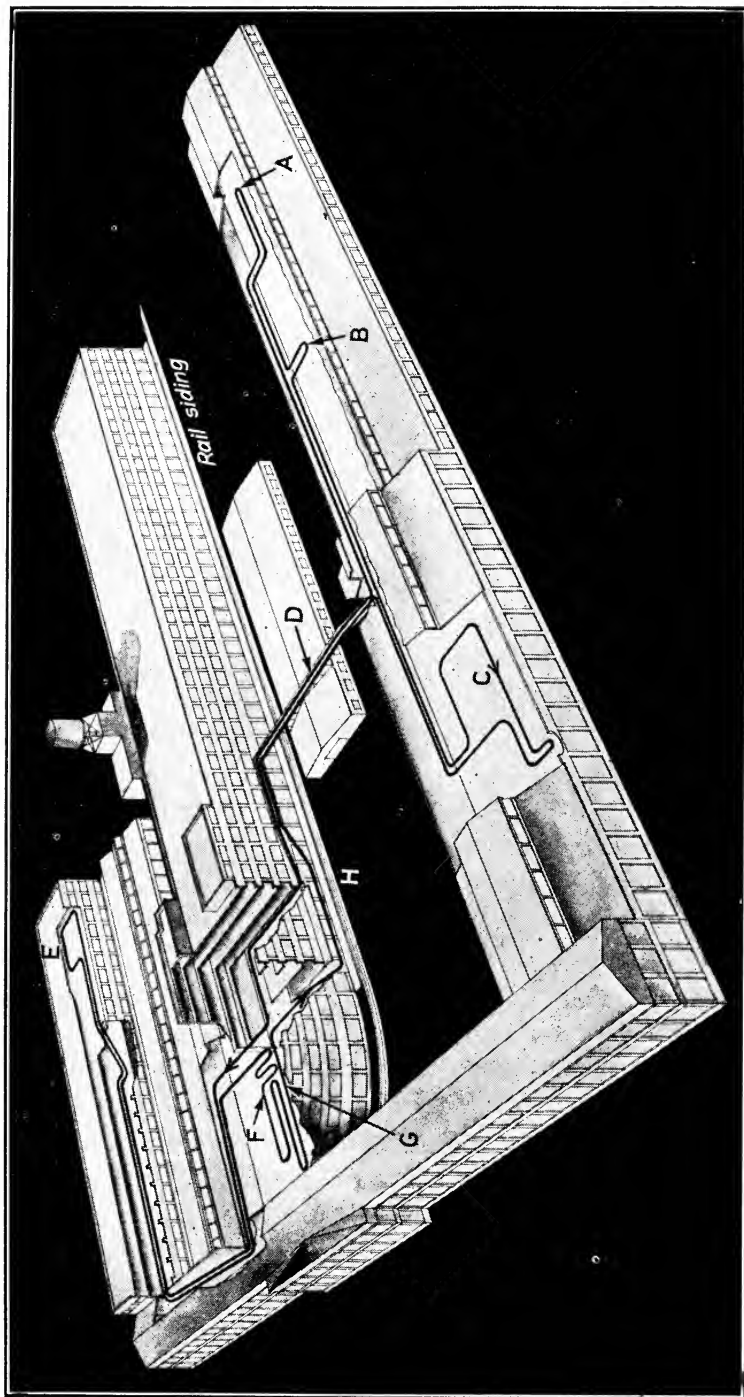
Hundreds of ft. of an endless overhead conveyor tie these wheel-making operations together. Figures show the following sequence: A, roll rim; B, weld; C, punch spokeholes; D, conveyor overpass; E, assemble spokes and inspect; F, clean and rustproof; G, paint and bake; H, ship. (Courtesy of Jervis B. Webb Company.)
